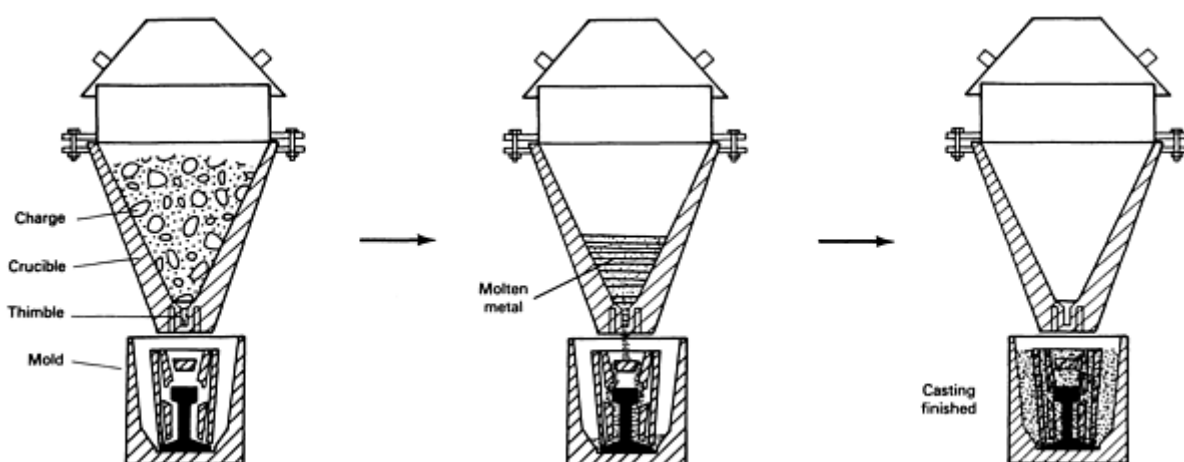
TYPICAL CRUCIBLE-MOLD SETUP FOR RAIL THERMITE WELDING
